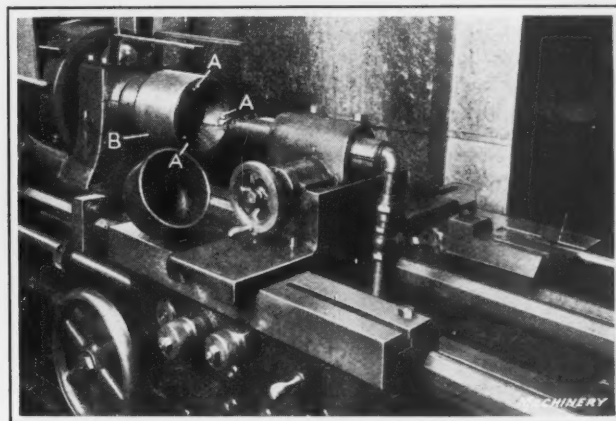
Lathe equipped for roughing out the Interior of the Shells. The Lathe is equipped with an Air-chuck and Taper-turning Attachment
